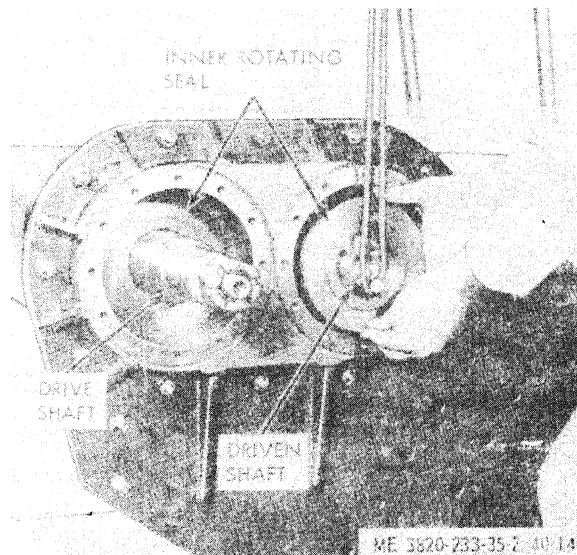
Inner rotating seal, drive end, removal and installation.
